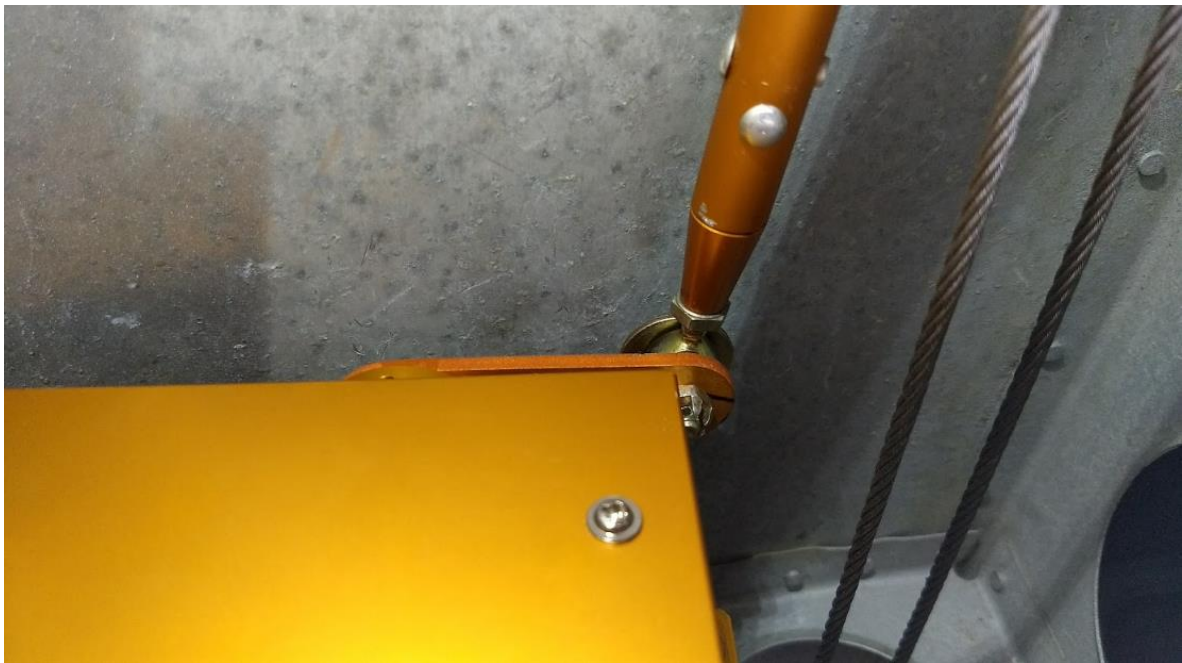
ROLL SERVO PUSH PULL TUBE ASSEMBLY
